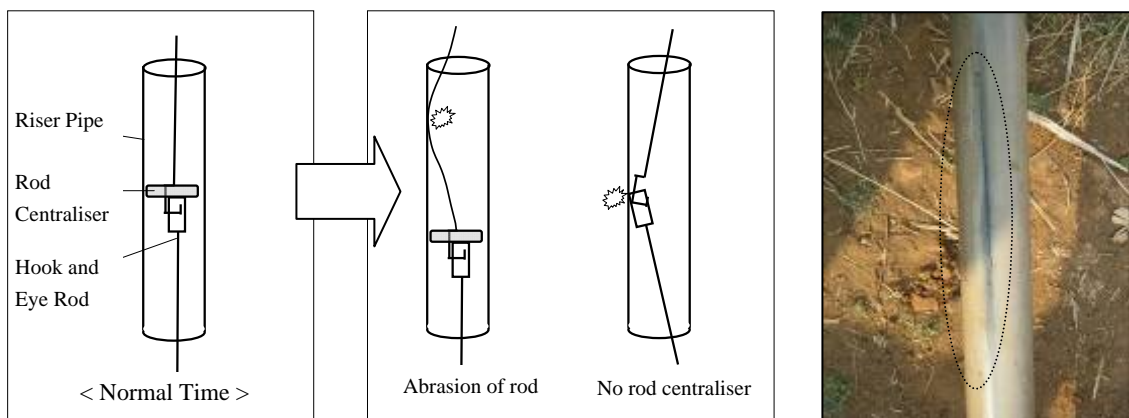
Damage to Riser Pipe Due to Rod Defect
